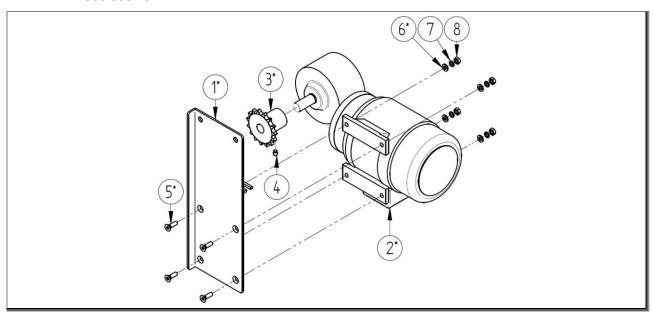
Parts list: External drive unit (positioned underneath) - motor unit - position of drive unit 14 - T.900.0007.02
